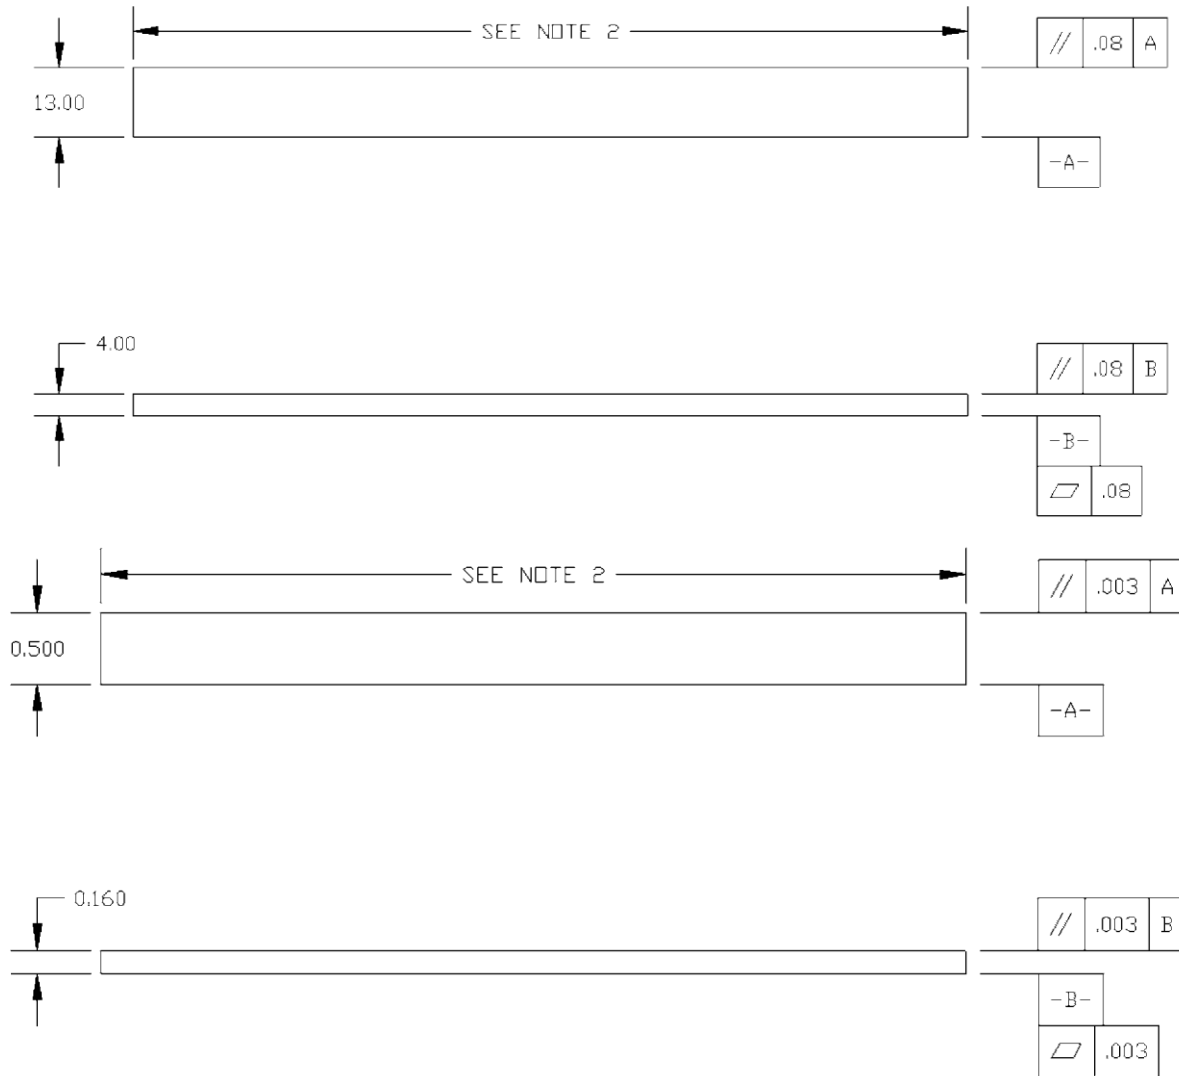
Standard Flexural Test Specimen Drawing (SI)
